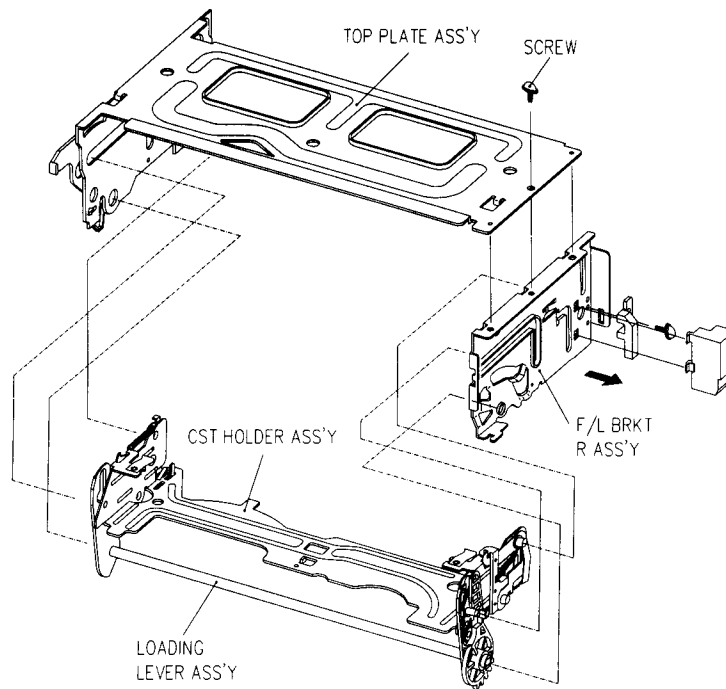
DISASSEMBLY OF THE FRONT LOADING ASS'Y
